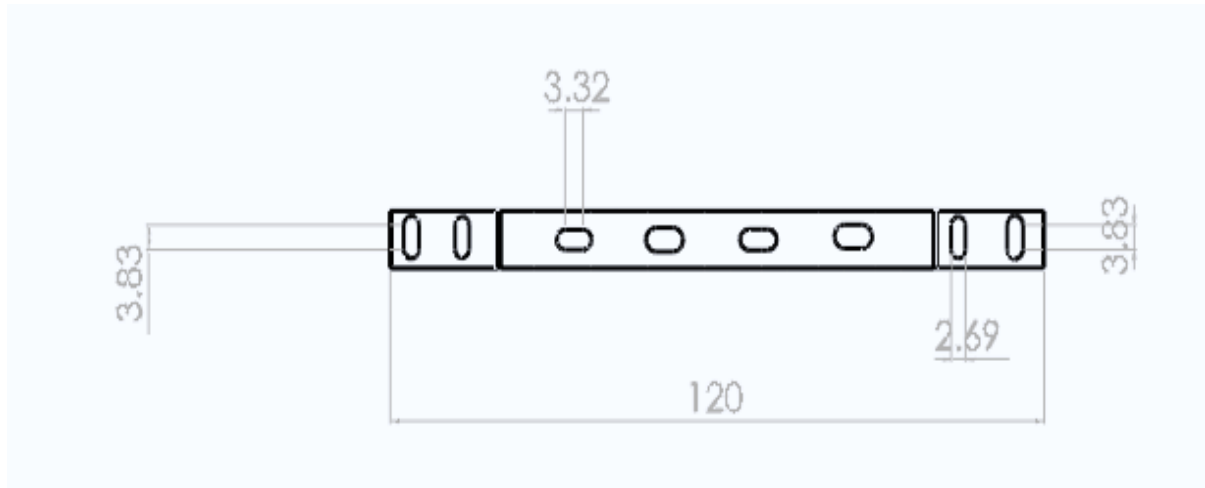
Existing Lifan 520 Model Steel Bumper Beam
